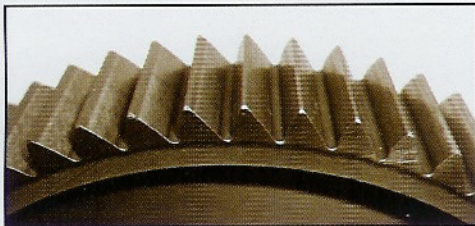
GEAR WITH ASYMMETRIC TEETH
